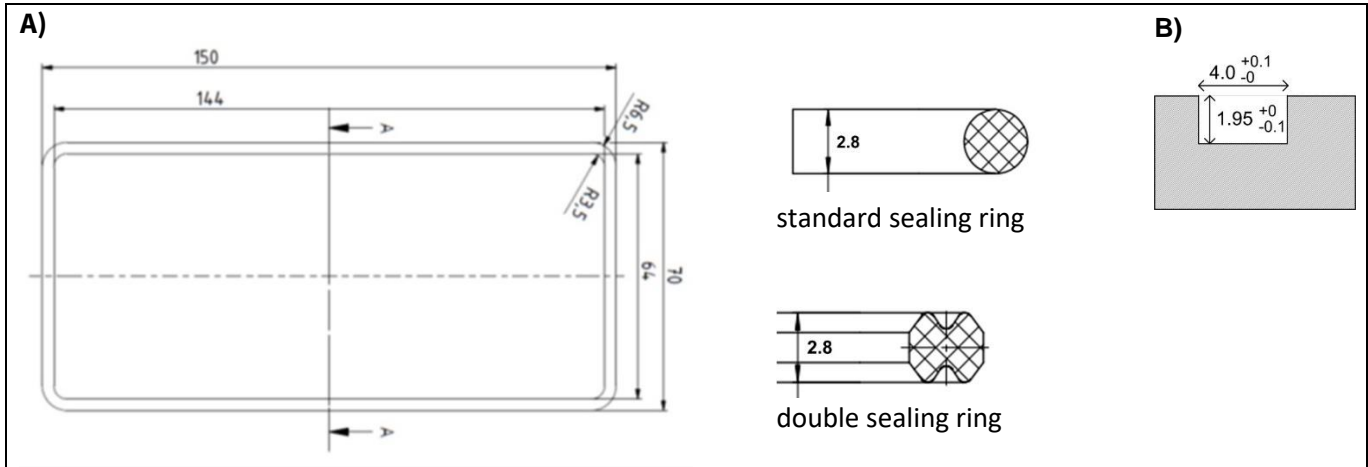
Drawing of a EPDM 70 sample o-ring (A) and corresponding groove size in the cooler (B).
